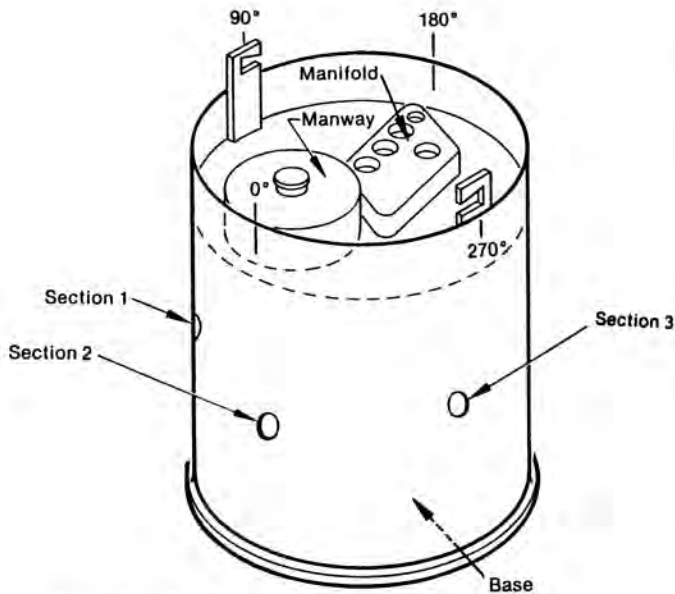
View of liner PF-3 showing locations where metal sections were removed.
